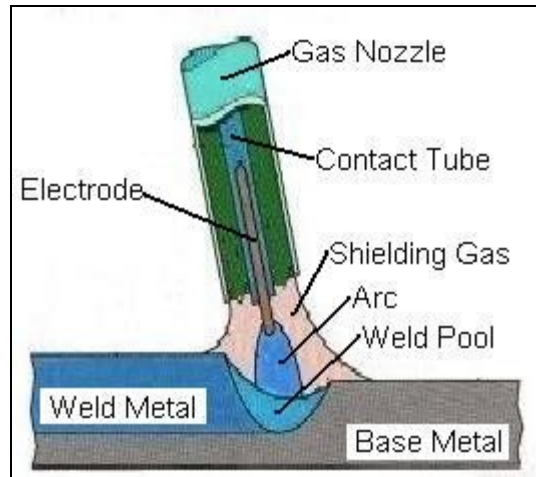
Gas Metal Arc Welding Process.
